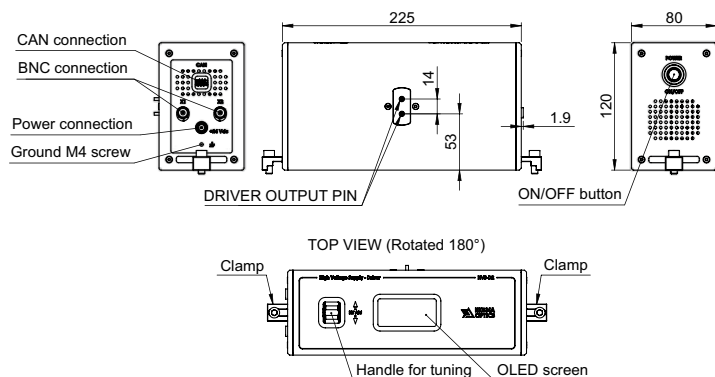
Outline drawing of encased type HVS-D2 driver with HV power supply
